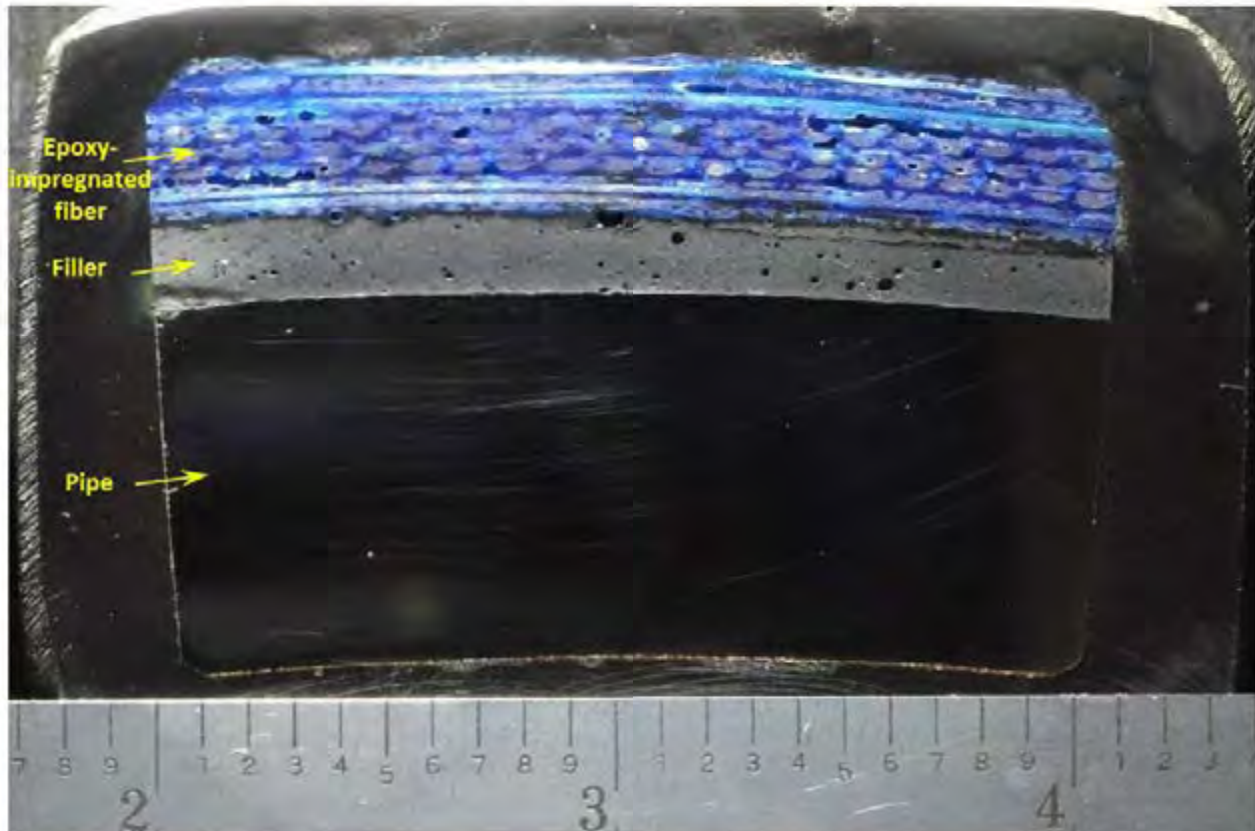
Metallographic cross-section through repair Area "C," a patch repair where no stricture banding was used.
